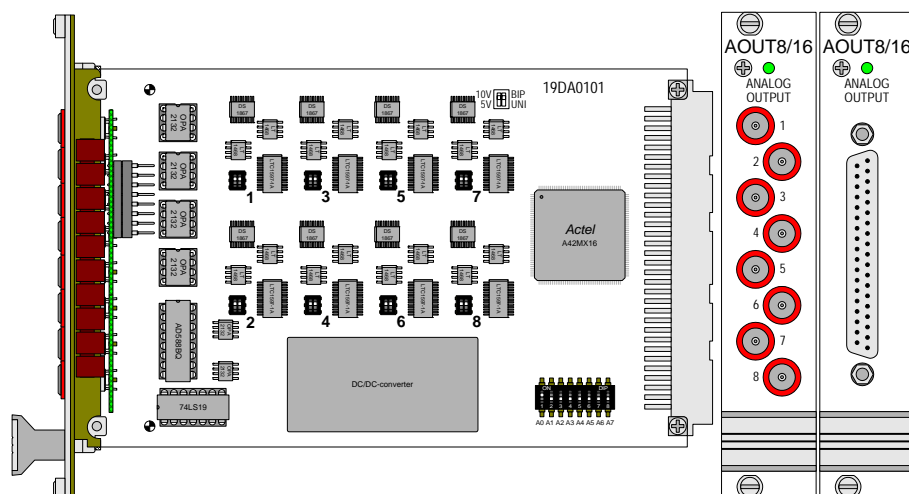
Pro-AOut-8/16 REVb: Board and front panel
